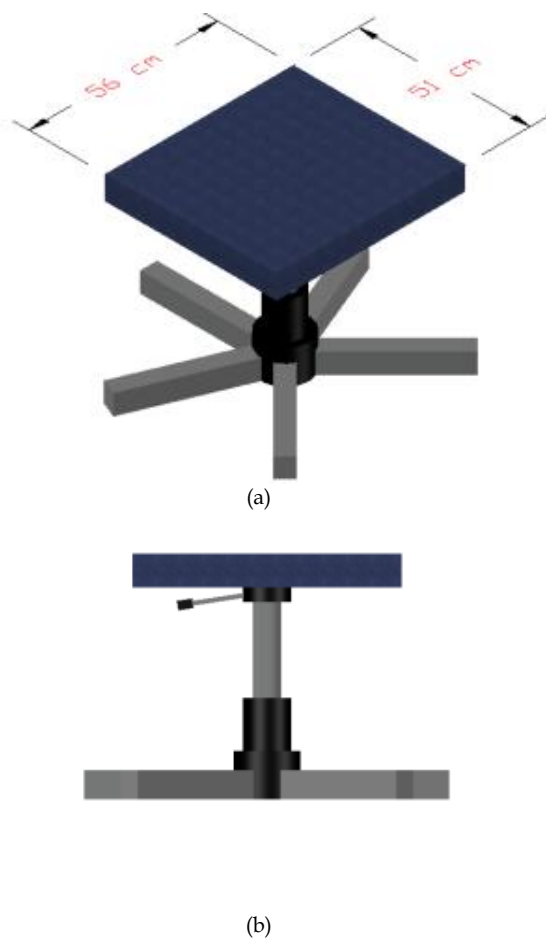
Adjustable workbench for welders: (a) isometric view and (b) front view.
